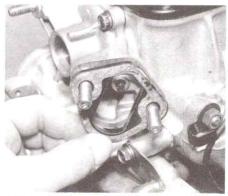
Checking the fuel pump operation (Sec 7)
